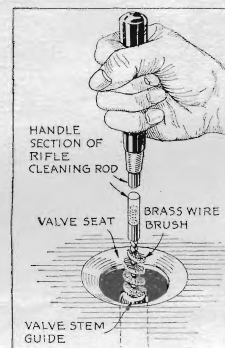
With the use of this wire brush carbon is cleaned from the valve guide.
